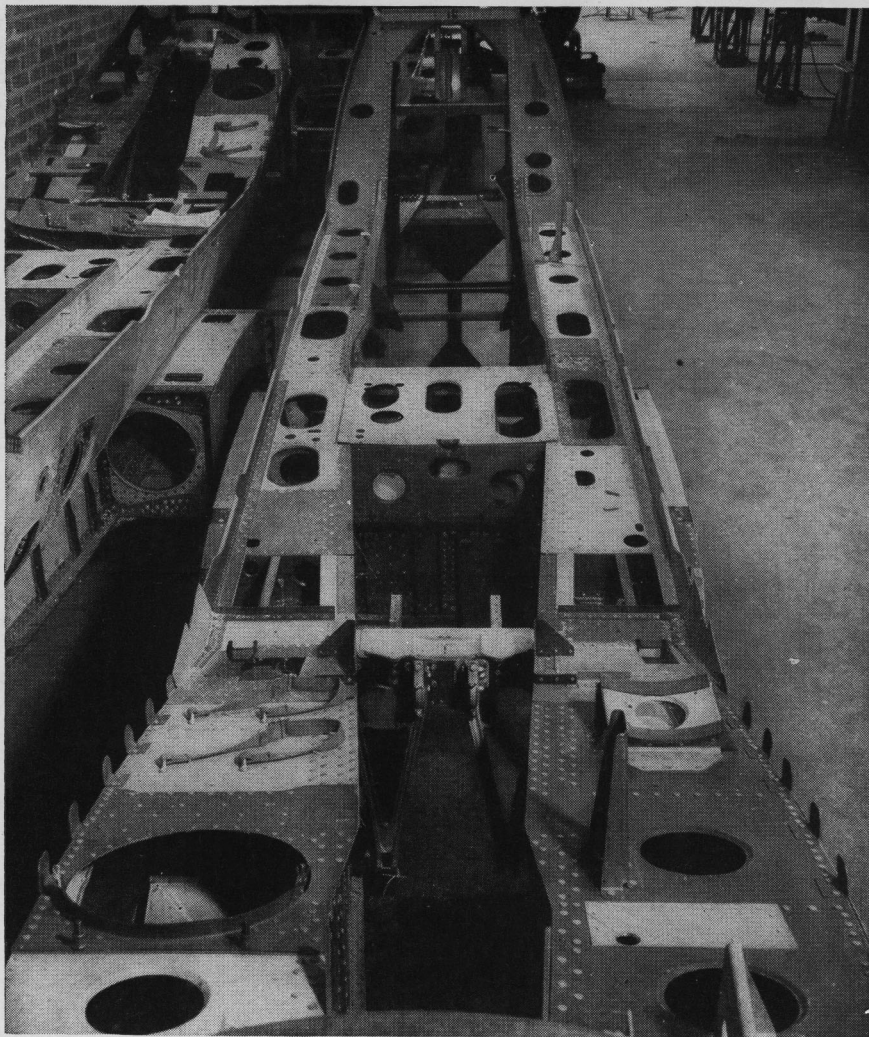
Looking rearward along the two parallel longitudinal beams making up the forward fuselage structure. The engine is located on the bed to the rear, and the pilot cabin is superimposed ahead of the engine location. The wing center section becomes an integral part of the fuselage.
